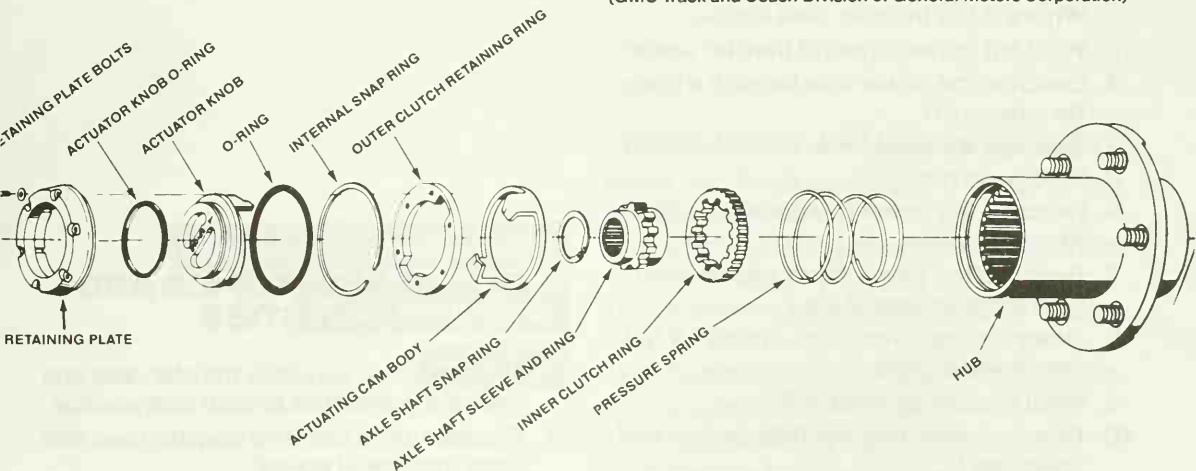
An exploded view of a free-running clutch hub. (GMC Truck and Coach Division of General Motors Corporation)
